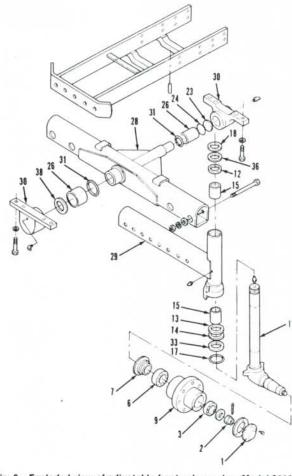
Exploded view of adjustable front axle used on Model 2110.
